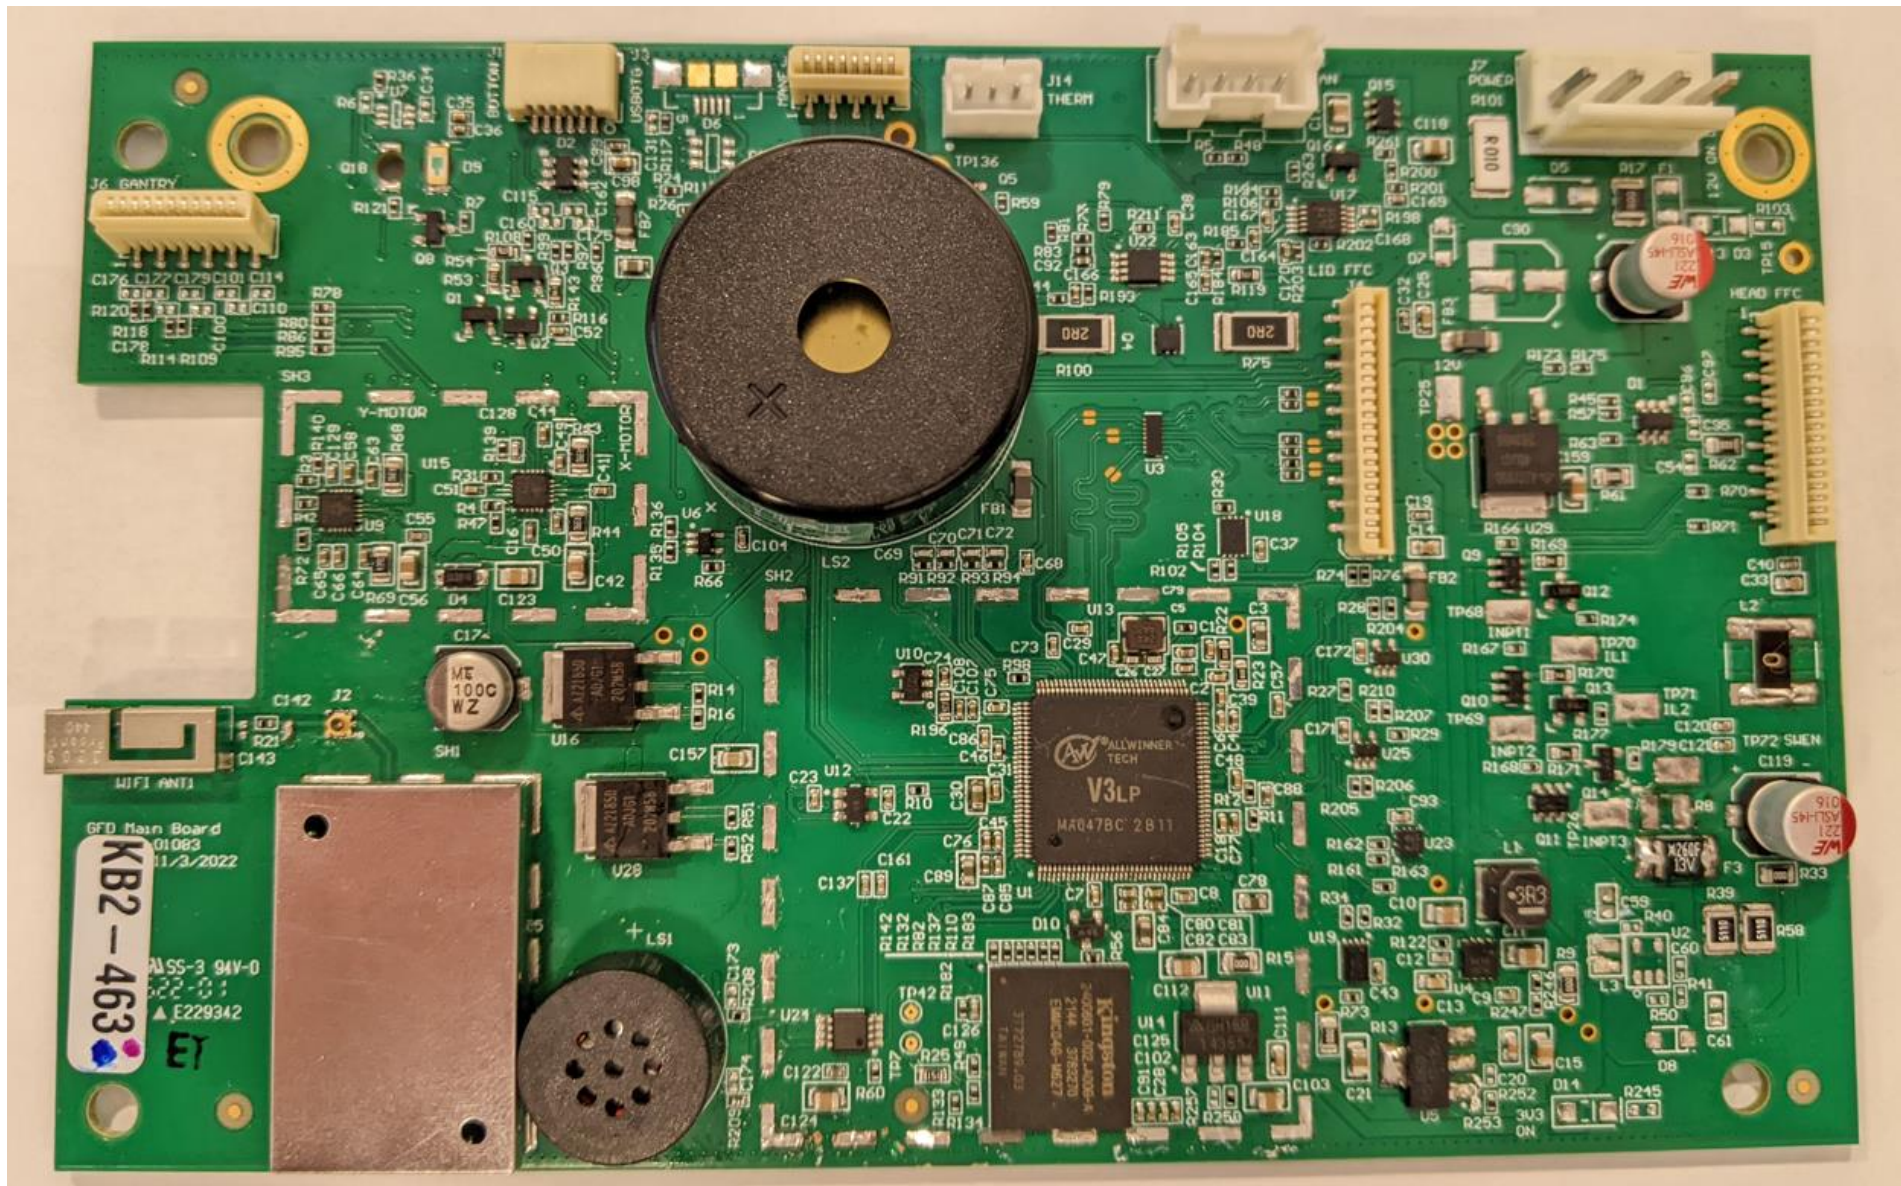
GF-PCA-00155- Control PCBA Top Side with EMI Shield Installed.
